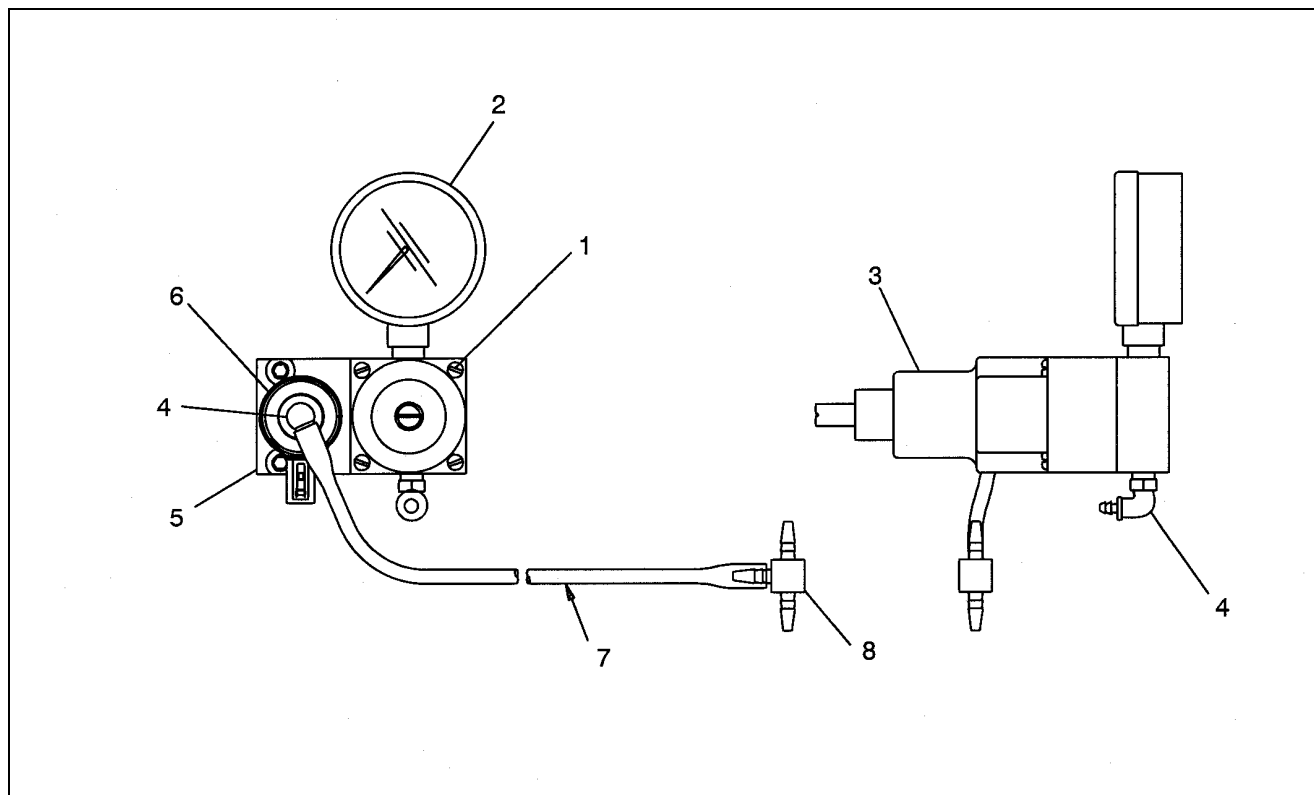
Autoflush Pump Assembly (SP390051) (Triumph Printer Only)
